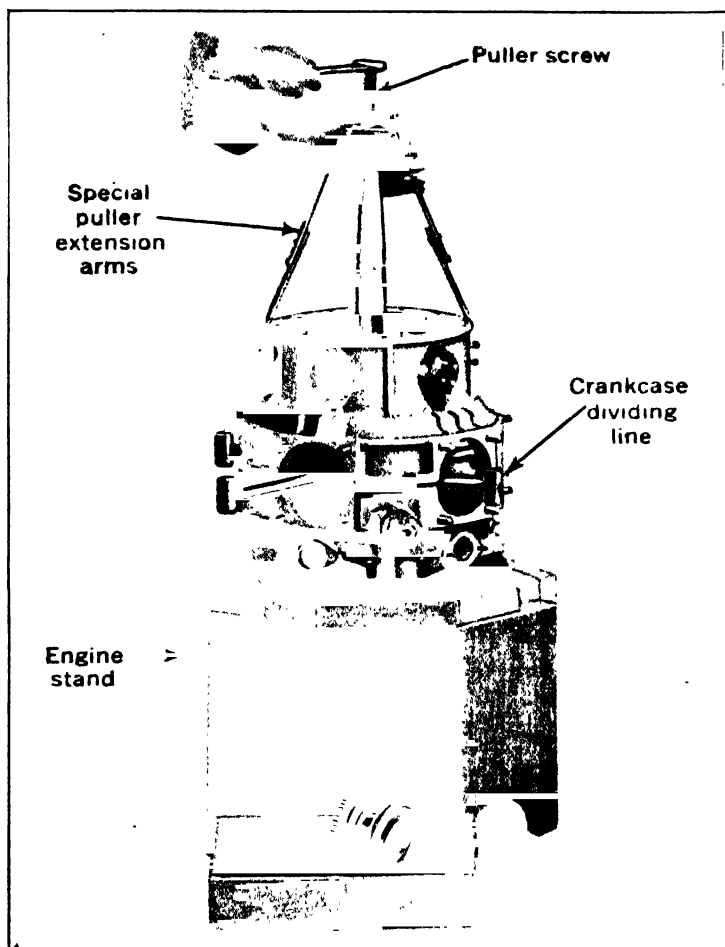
Illustrating the Use of Special Puller to Pull Crankcase of Siemens-Halske Engine Apart.
